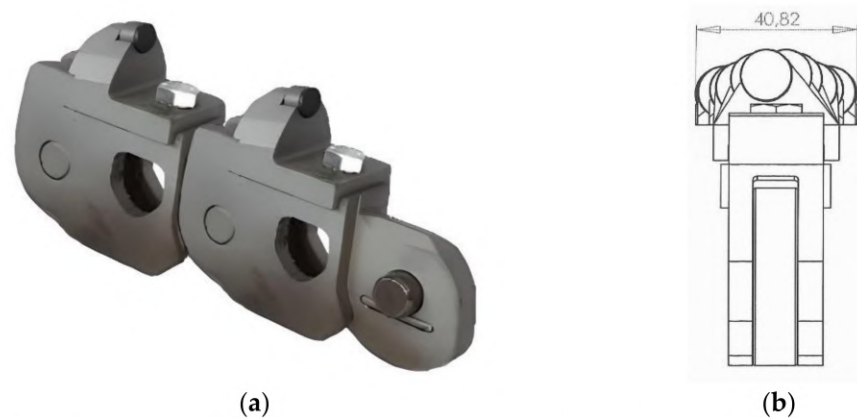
Detail of the tools and their tool holder: (a) front view of the arrangement of the tools in the execution of the cut with a thickness of 40.82 mm, (b) cutting chain front view.
